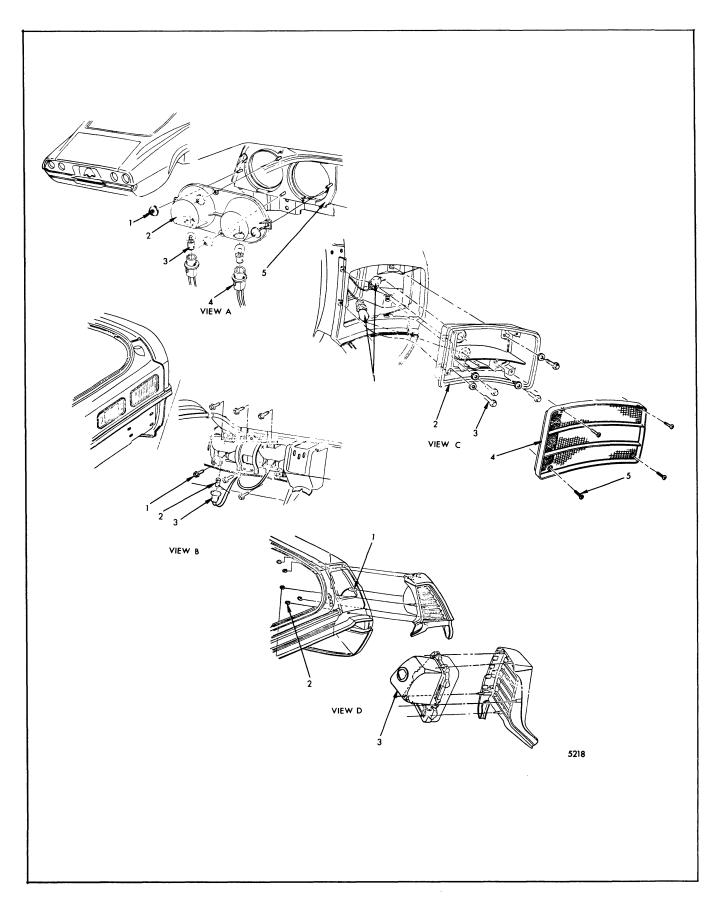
Tail Lamp Installation - Chevrolet Styles
